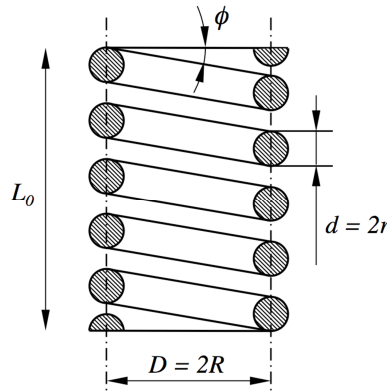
Definition of the geometric parameters of the linear helical spring.
